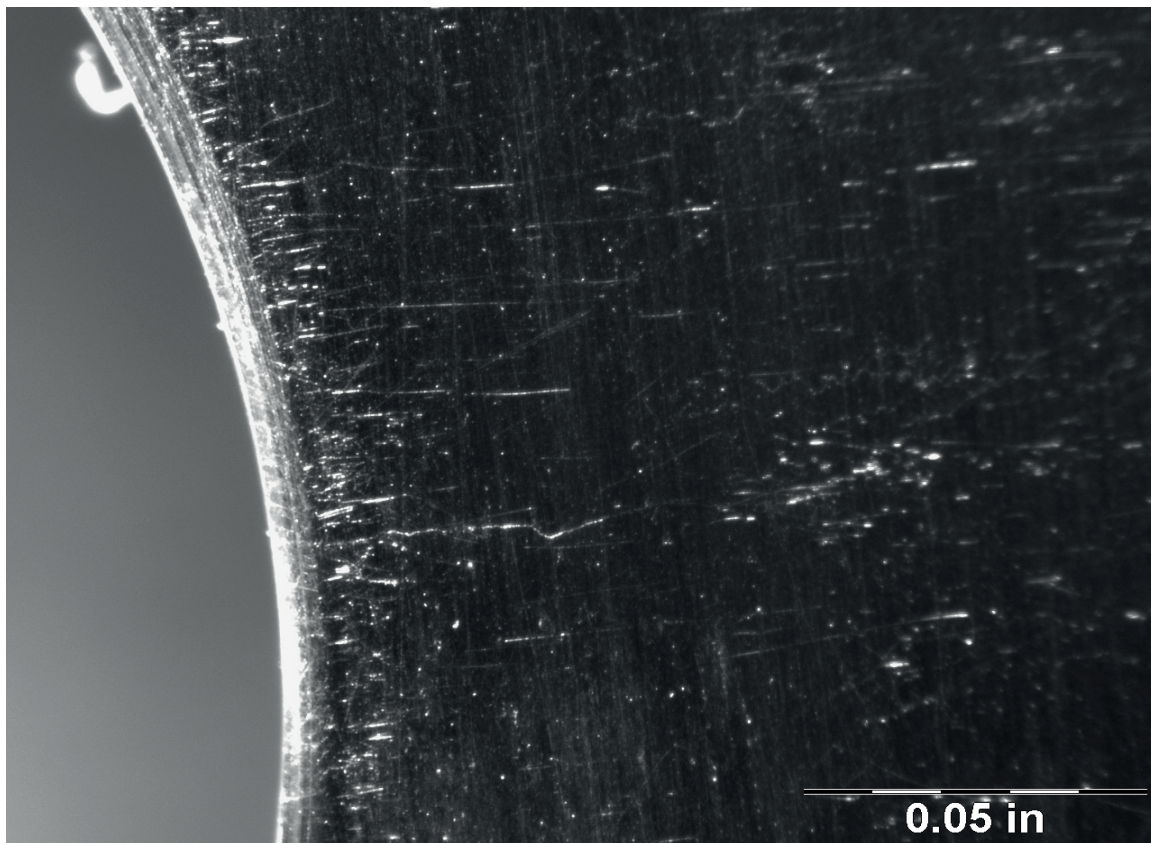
Image of Surface Crack in Coupon Cx4N1-03-D, Surface Crack Length is 0.0972 inch.
